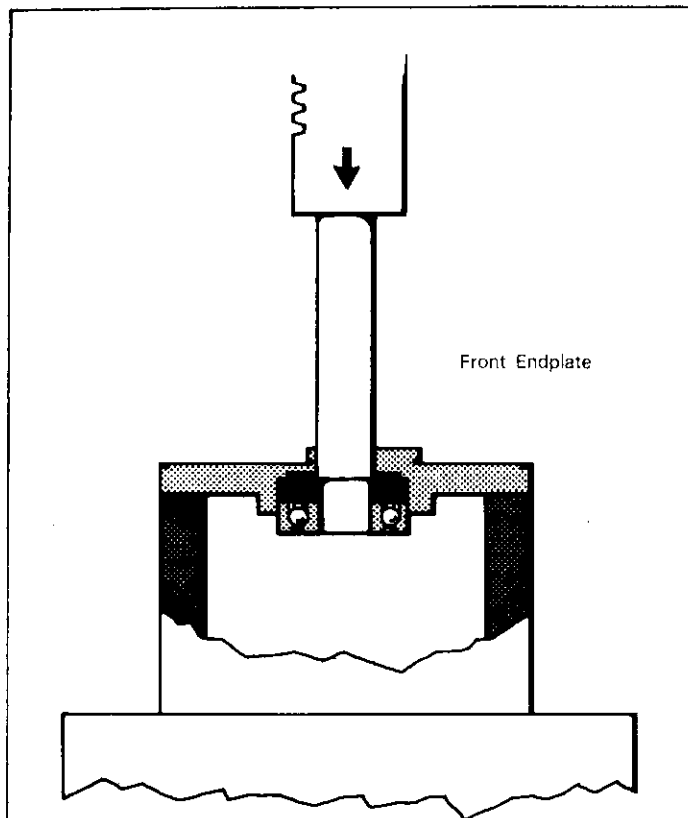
and 3.7 - Pressing Rotor Shaft Bearings from Endplates
